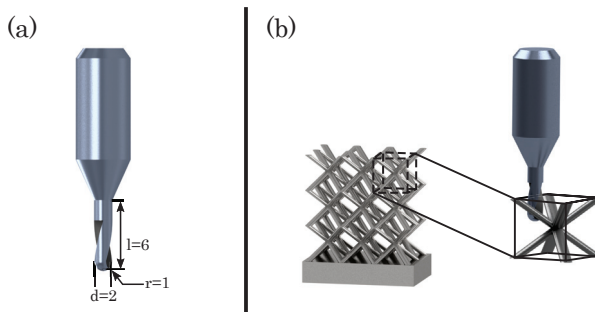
(a) Dimensions of the milling cutter, (b) milling of lattice structures.
